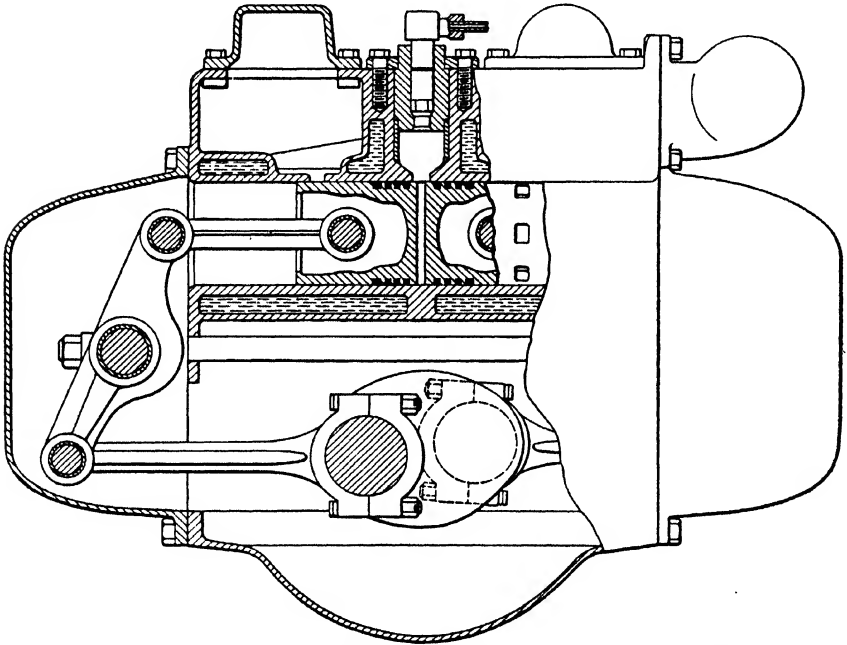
Cutaway view of Hill opposed-piston two-stroke cycle Diesel engine.
